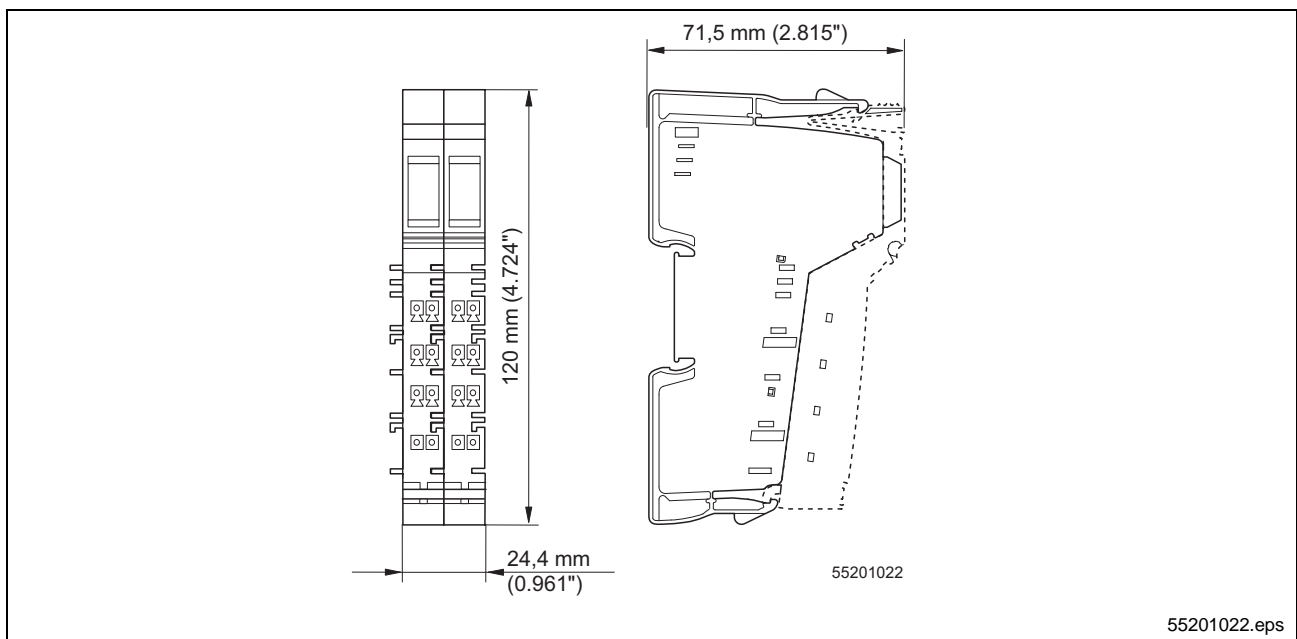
Dimensions of the electronic socket (4-slot housing)
